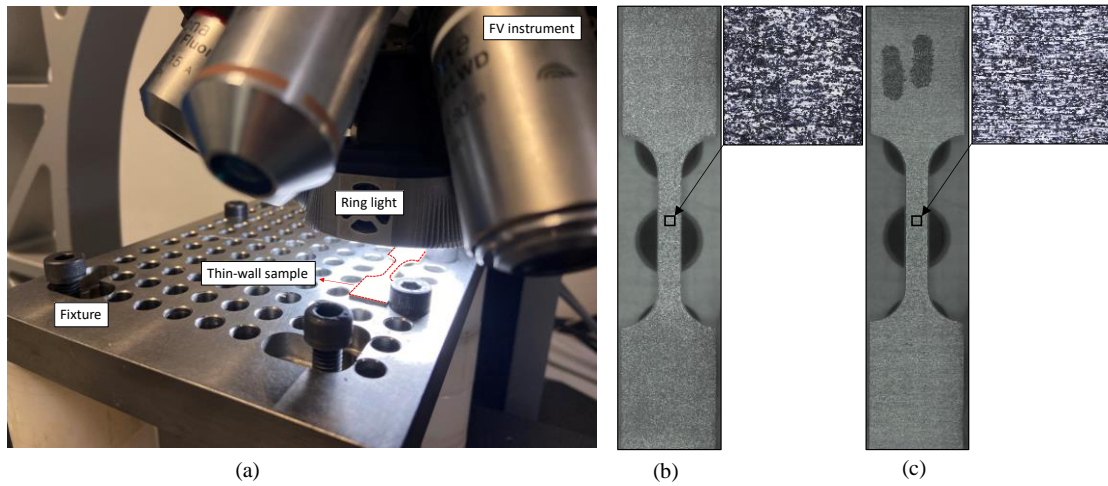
Surface scan of the printed specimens a) Scan set-up, b) Down-skin surface of the as-built specimen, c) Up-skin surface of the as-built specimen
